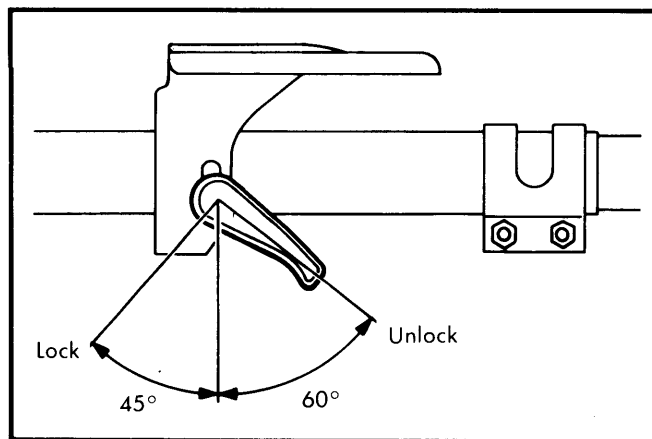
Installing Tilt Bolt and Lock Tilt Lever into Tilt Bracket
